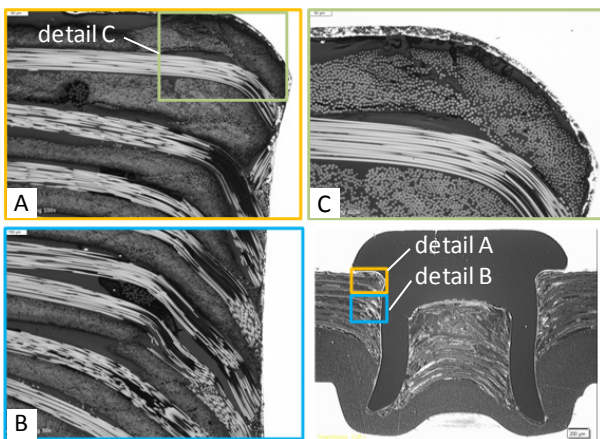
Close-up of the deformed and damaged laminate structure near the rivet shank under the rivet head.
